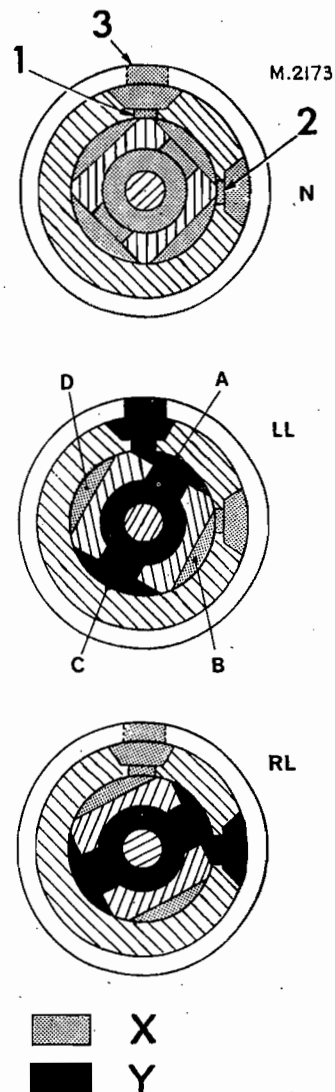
SECTIONS THROUGH VALVE CHAMBERS SHOWING FLUID CIRCUIT IN NEUTRAL AND ON EACH LOCK
